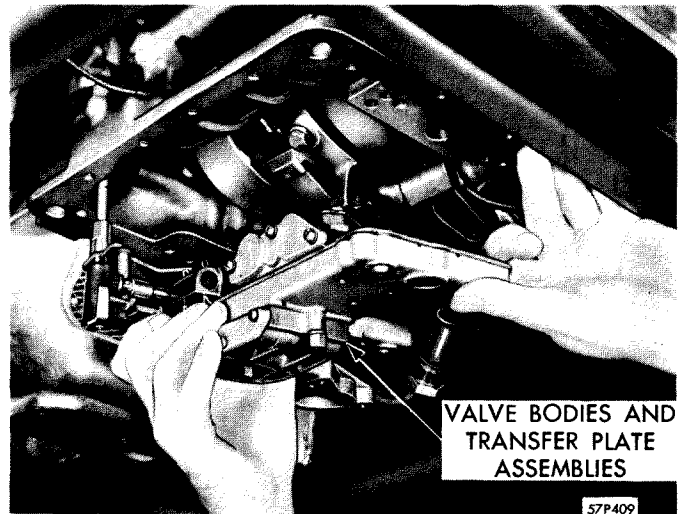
Removal and Installation of Valve Bodies and Transfer Plate Assembly
